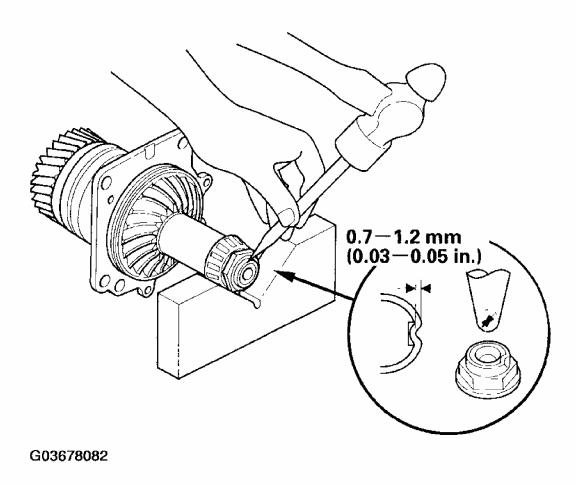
Staking Locknut On Transfer Shaft Using 3.5mm Punch Courtesy of AMERICAN HONDA MOTOR CO., INC.
